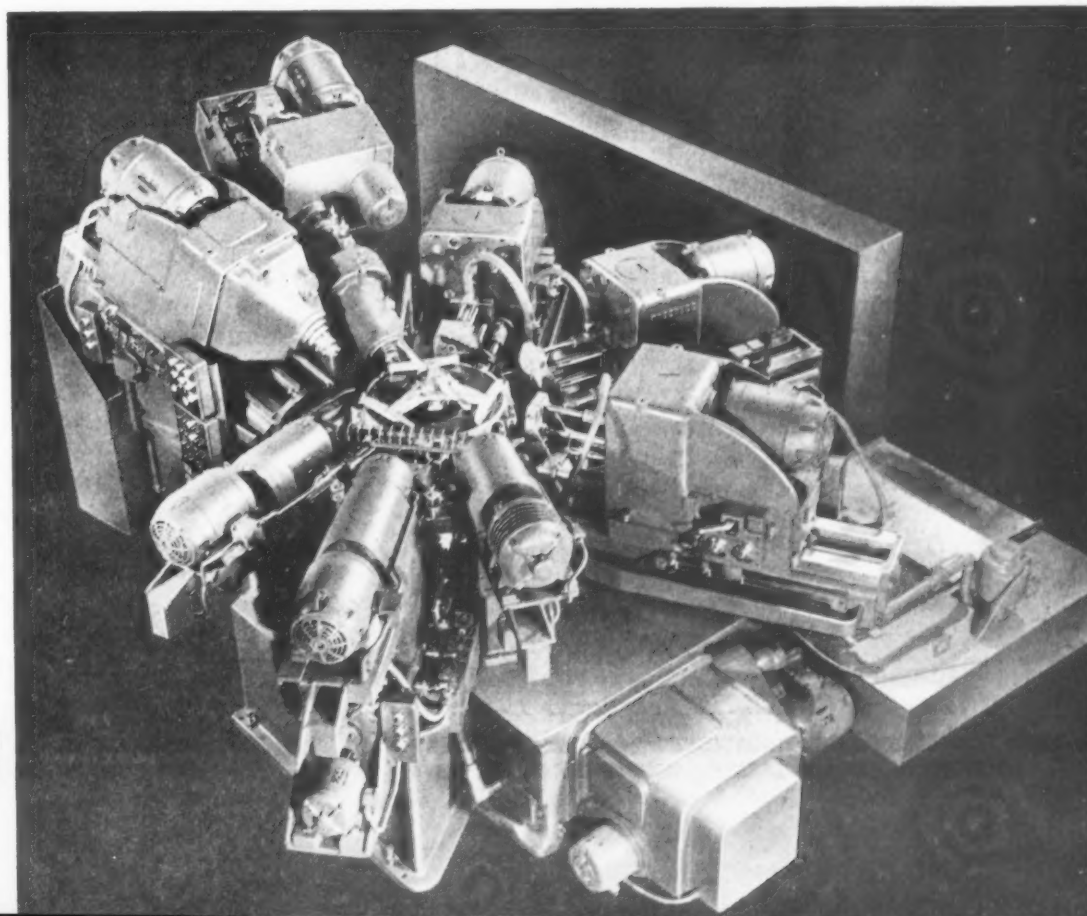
Special Machine for Milling a Semi-circular Oil-groove around the Trunnions of the Reduction Gear Carrier Rings
